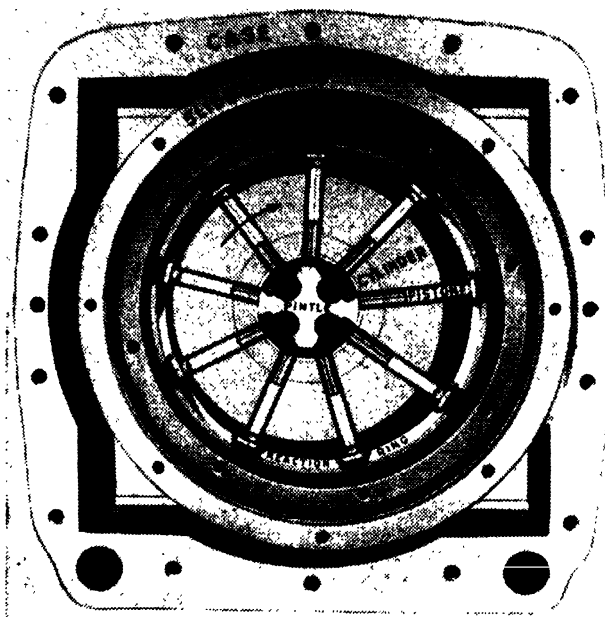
Maximum-stroke position of Oilgear pump, right-hand. (*The Oilgear Co., Milwaukee, Wis.*)
